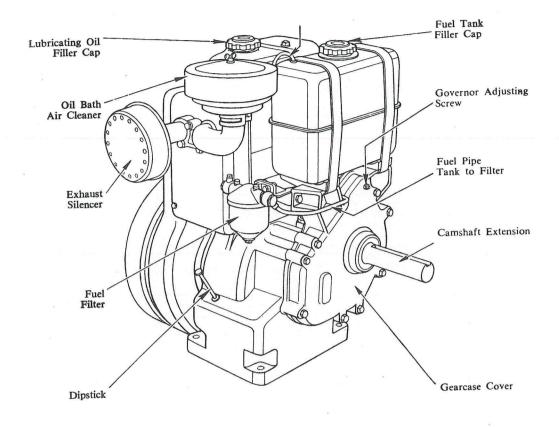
Type LD1 or SL1 Engine—Back View.
